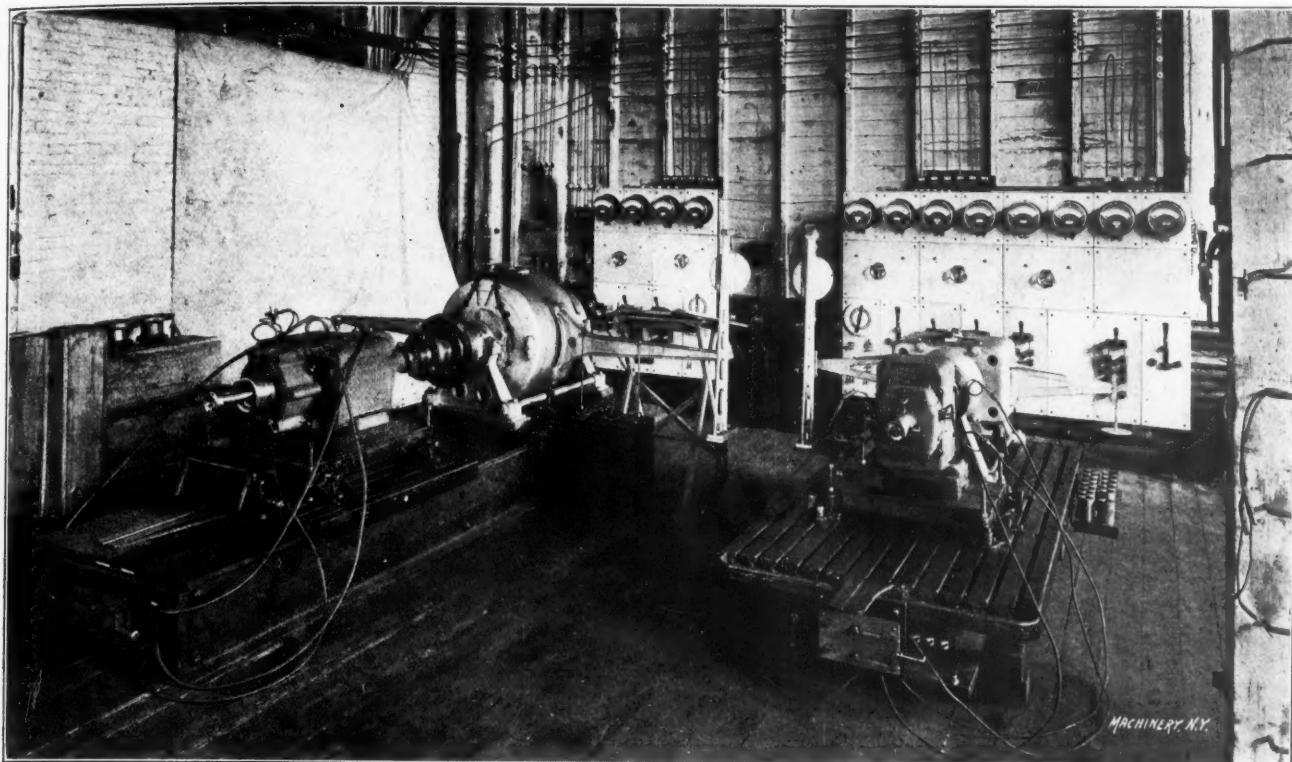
View of Crane Motor Testing Apparatus, Pawling & Harnischfeger Shop, showing Switchboard.
